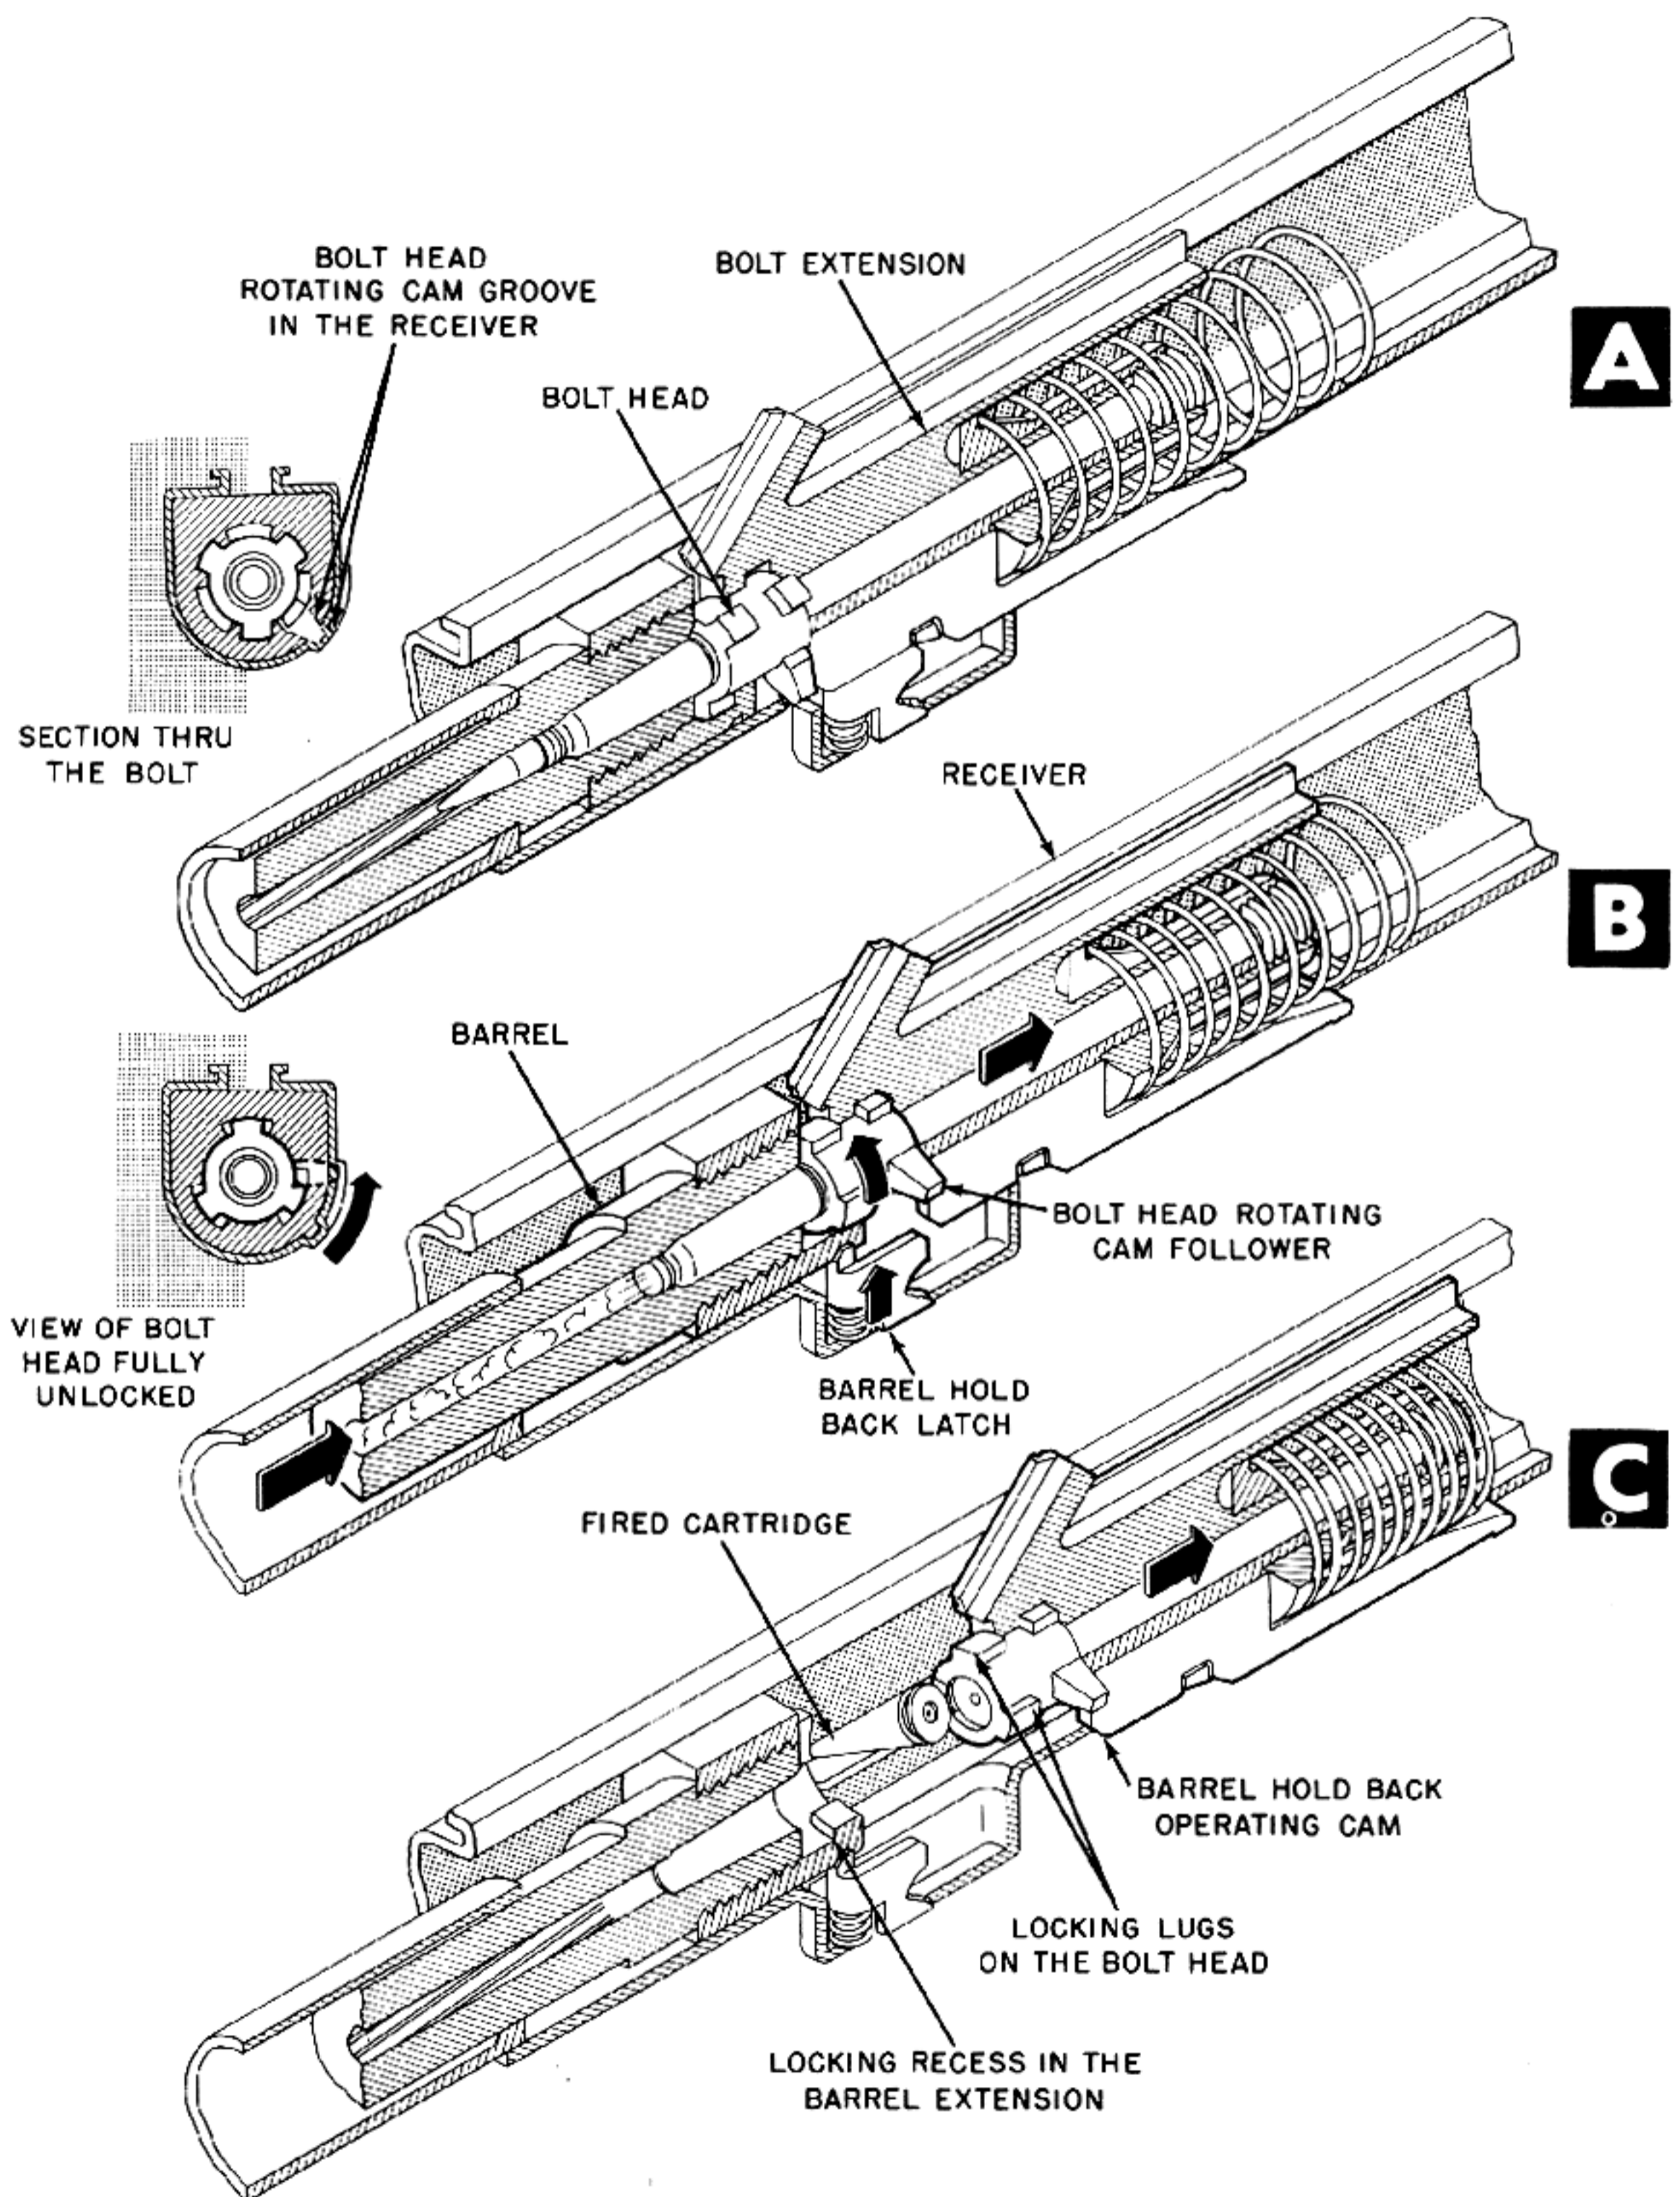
Solid Bolt Head Is Unlocked by Cam Groove in the Receiver.
